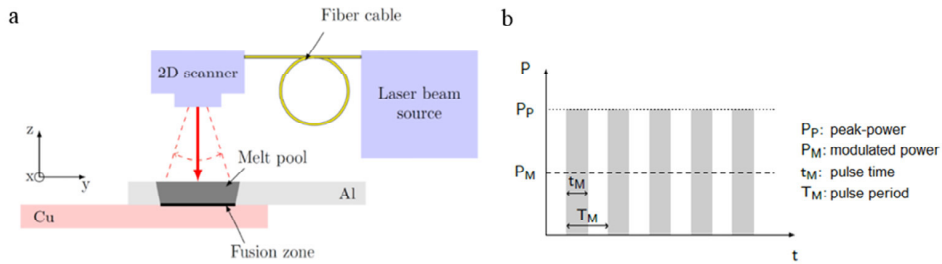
(a) Laser braze-welding principle; (b) laser power modulation.
